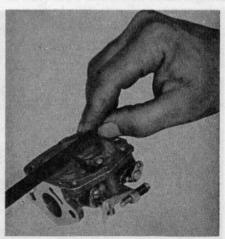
On McCulloch carburetors, be sure diaphragm lever is flush with machined gasket surface of carburetor body as shown.
